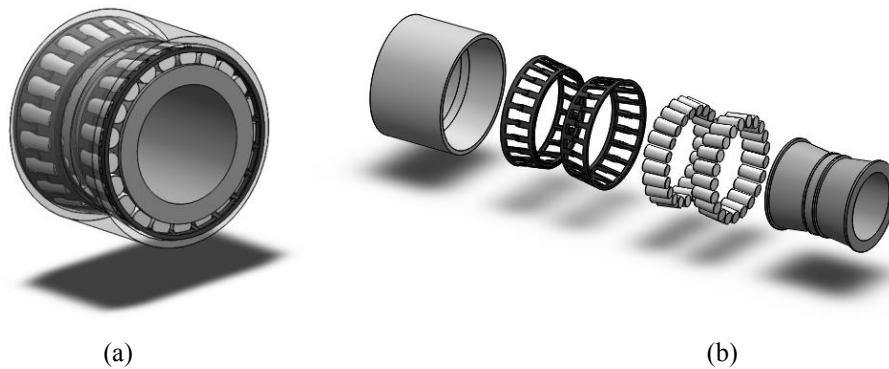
Typical tapered rolling bearing elements. (a) Assembled roller bearing, with a semi-transparent outer raceway; (b) Individual elements of the rolling bearing, from left to right: outer raceway, cages, rollers and inner raceway.
